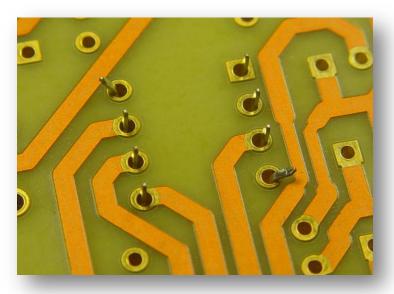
Bend opposite corner pins to hold the chip in the PCB.
